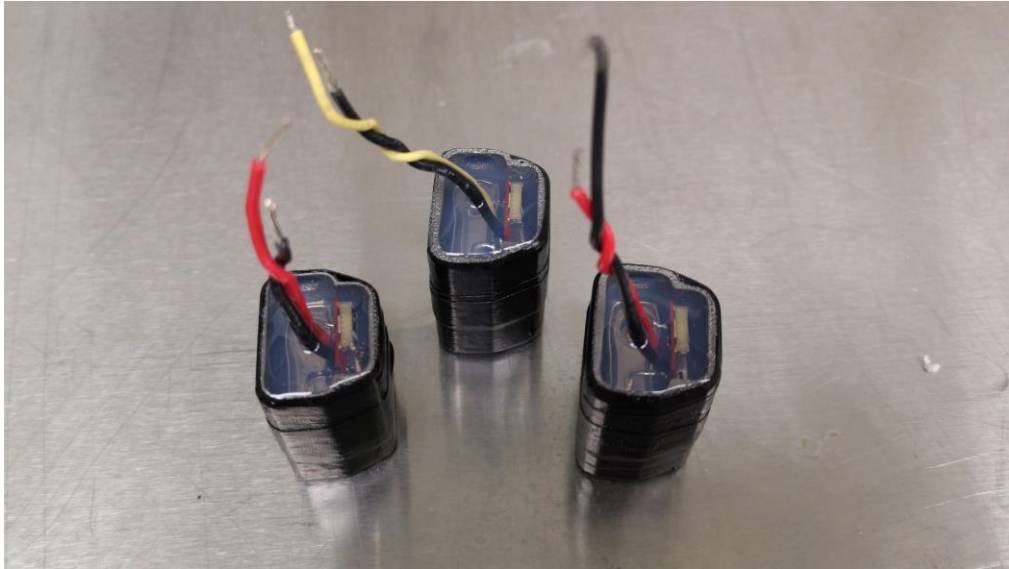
Sensing packages in Step 8 of assembly depicting the second silicone stage curing in vacuum chamber.
